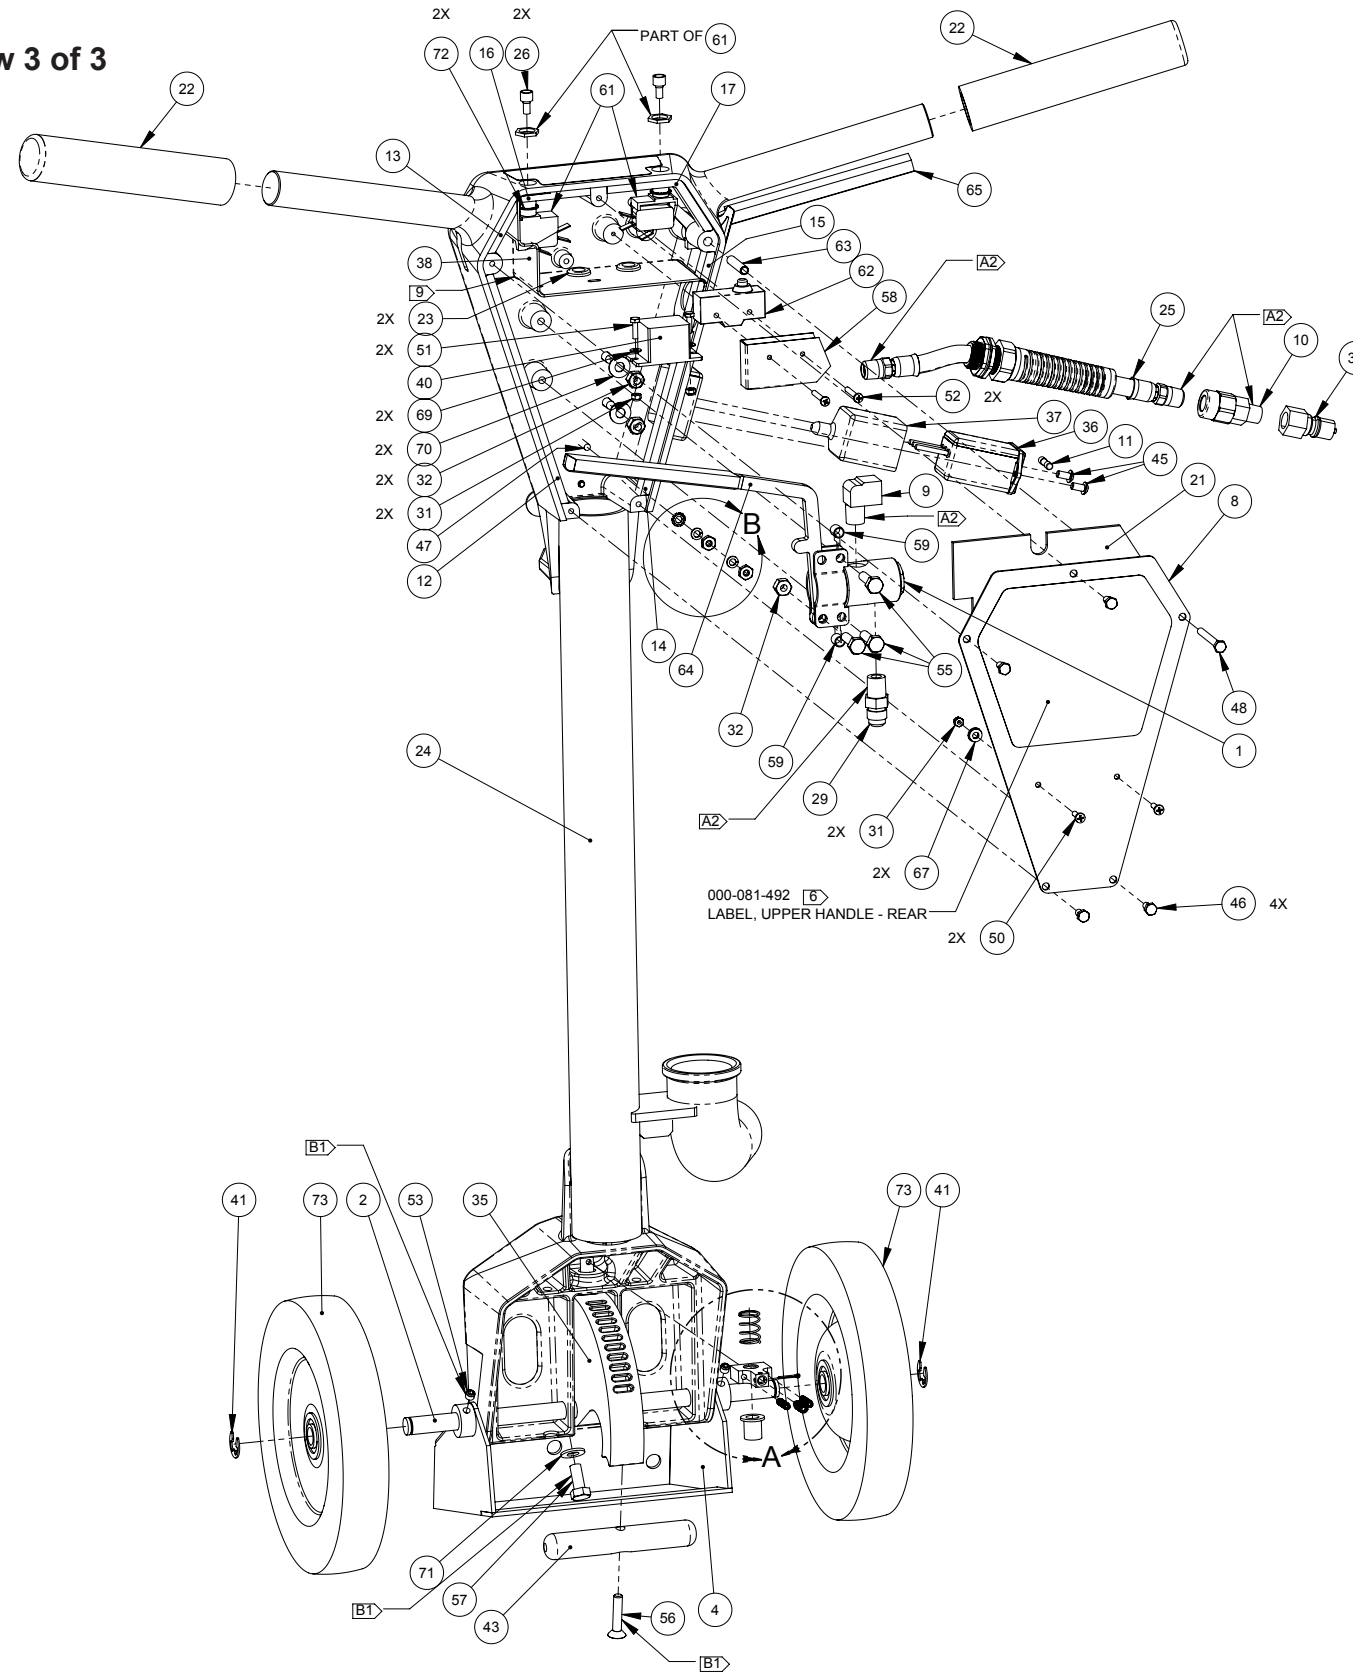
Upper and Lower Handle Assembly - View 3 of 3
